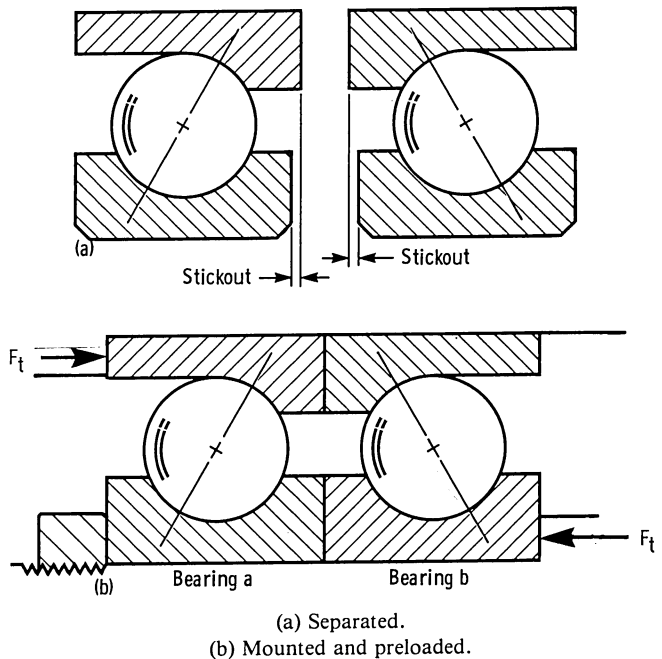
Angular-contact bearings in back-to-back arrangement, shown individually as manufactured and as mounted with preload. (From Hamrock and Anderson, 1983.)
